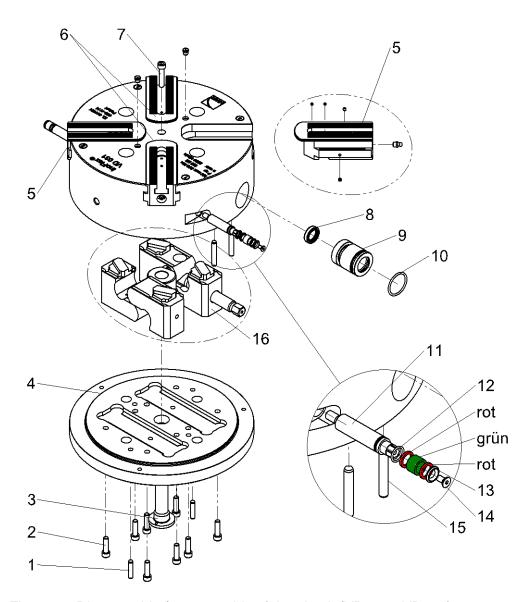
Disassembly / re-assembly of the chuck (VD016 - VD040)
